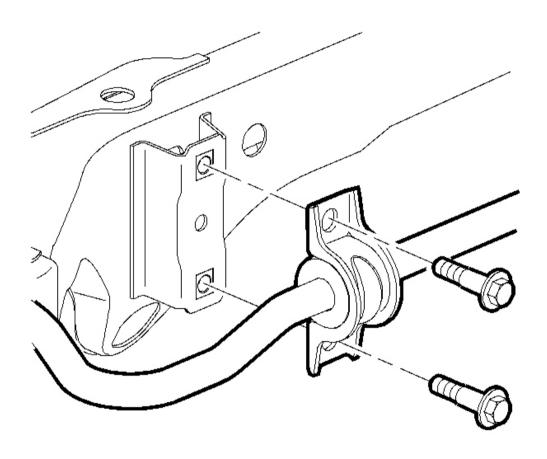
Stabilizer Bar Clamp & Bolts Courtesy of GENERAL MOTORS CORP.
